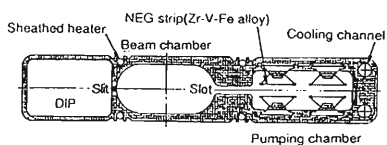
Cross-sectional view of the bending chamber with NEG strips.
